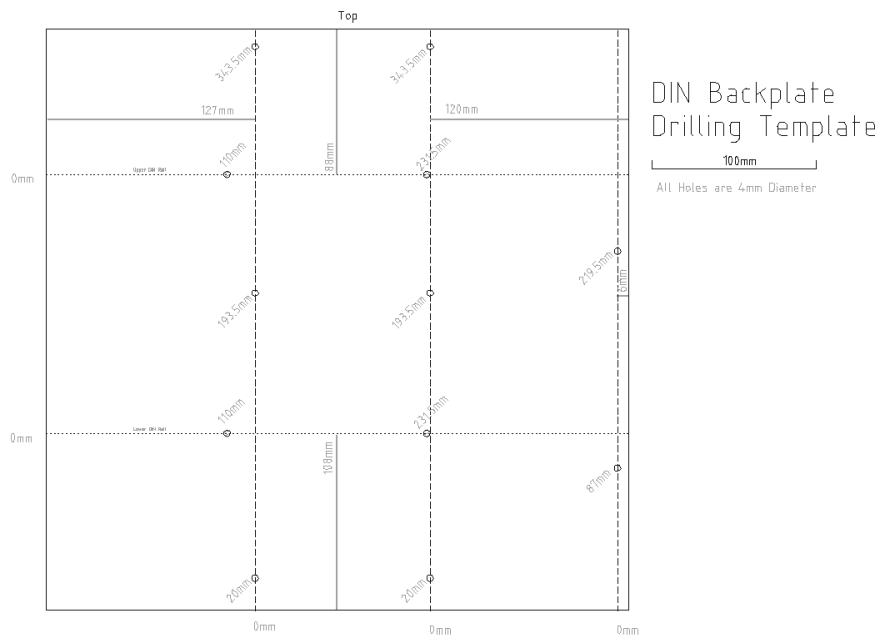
Drilling template of DIN backplate for mounting DIN rail and trunking. All holes marked on the template resemble a 4mm tapped hole. For further detail refer to the CAD files available with this document.
